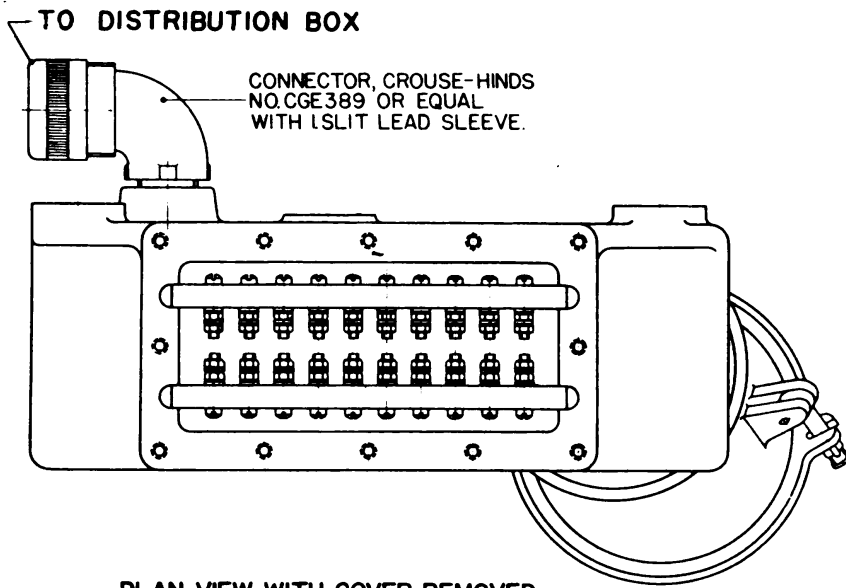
RECEPTACLE BOX, 18 AND 19 POLE - ASSEMBLY
